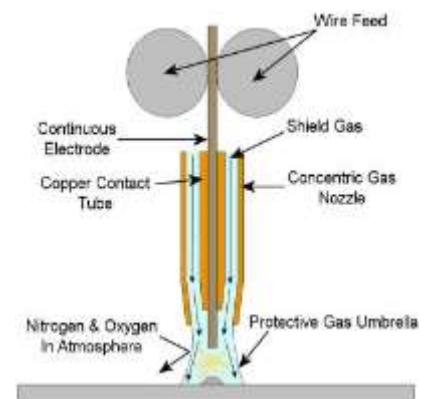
MIG welding (Engineer Student, 2014)
